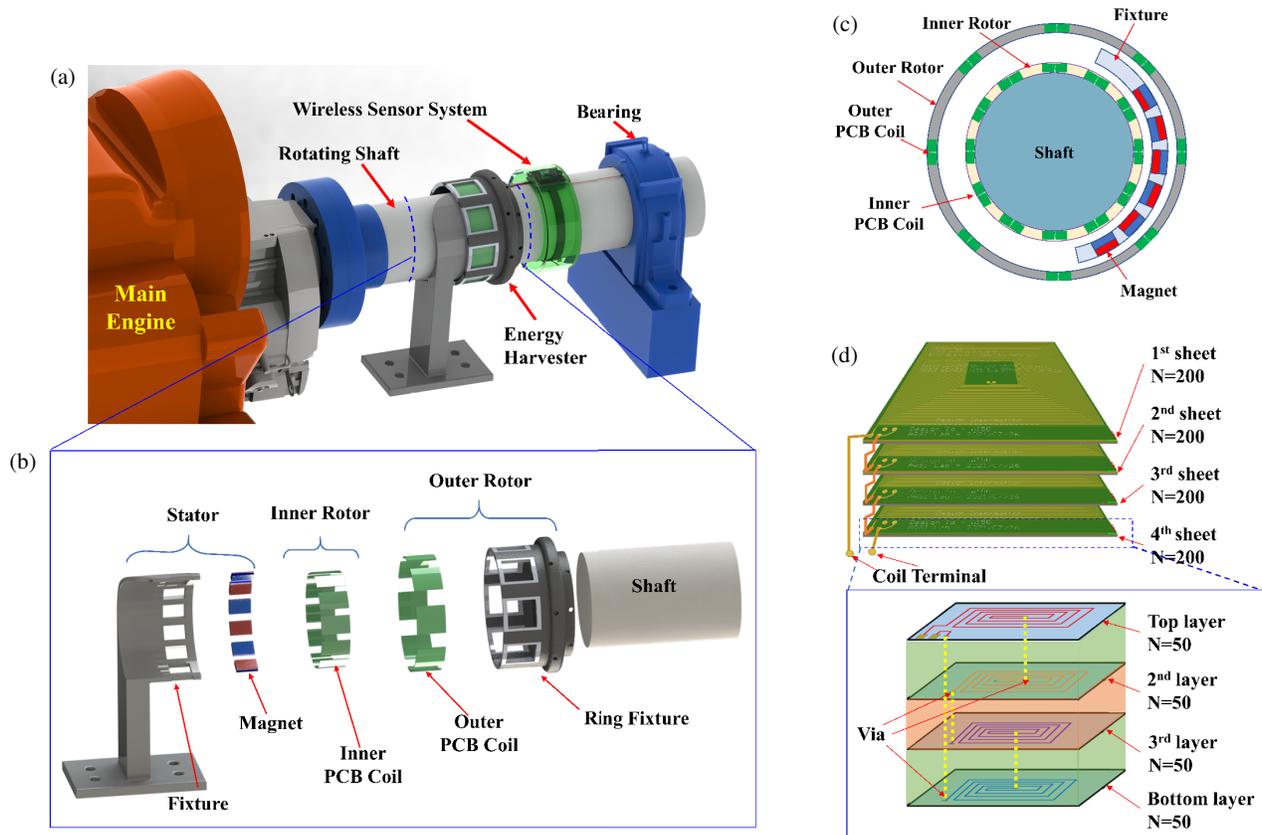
(a) The 3D structural overview of the EH for powering the WSS, (b) the 3D exploded schematic view of the proposed EH, (c) the cross-sectional view, and (d) the configuration of the coil bundle integrated into four PCB sheets, with each PCB sheet formed by laminating four layers.
